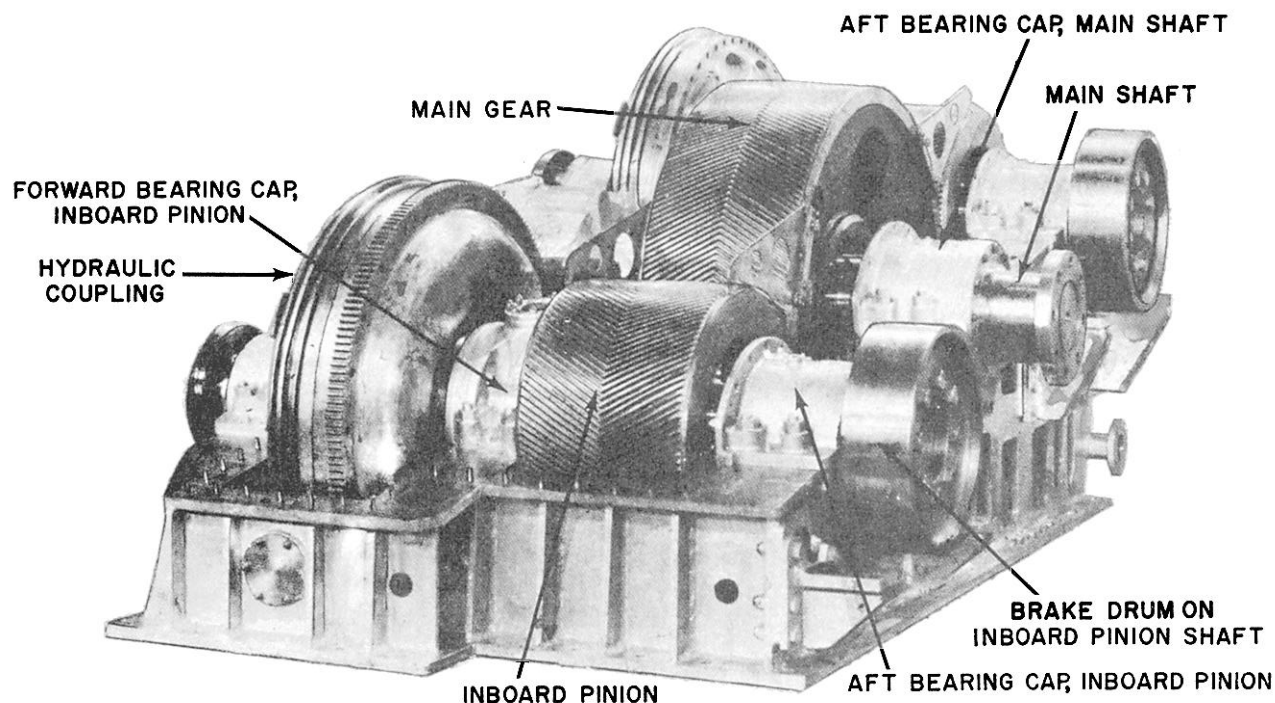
Starboard gear unit with cover removed—view from aft and inboard.
